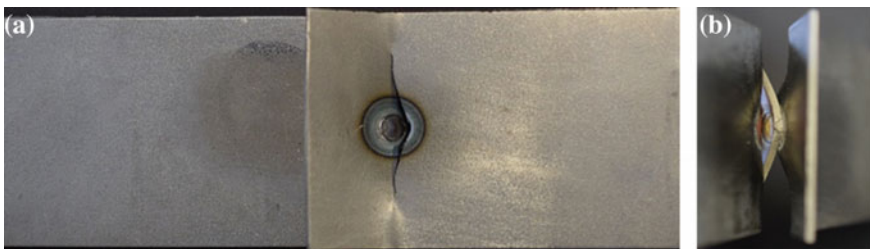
General fatigue fracture appearance for a DP590 sample and b DP980 sample
